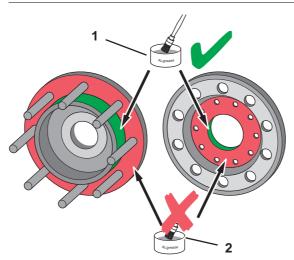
Lubricating points and dry points on the wheel and hub
